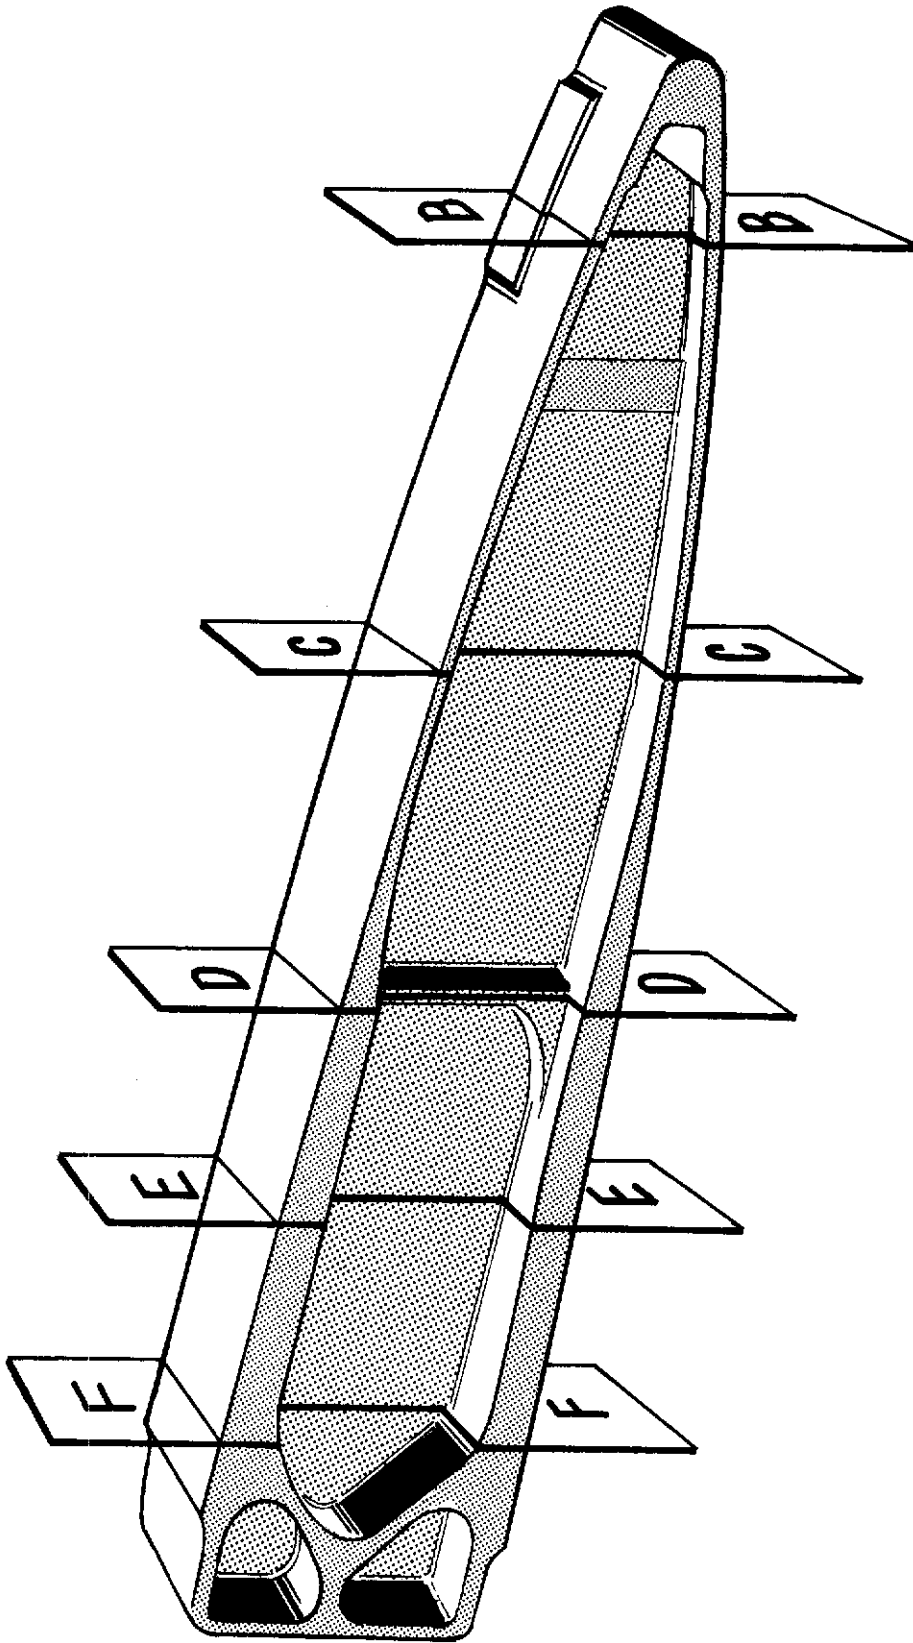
Locations of Inspection Section Planes Employed for Dimensional Evaluation of Fin Rib Forgings.
